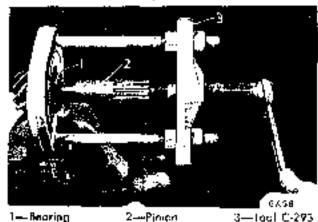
Removing Axle Drive Pinion Rear Bearing (1936-42 Models)
